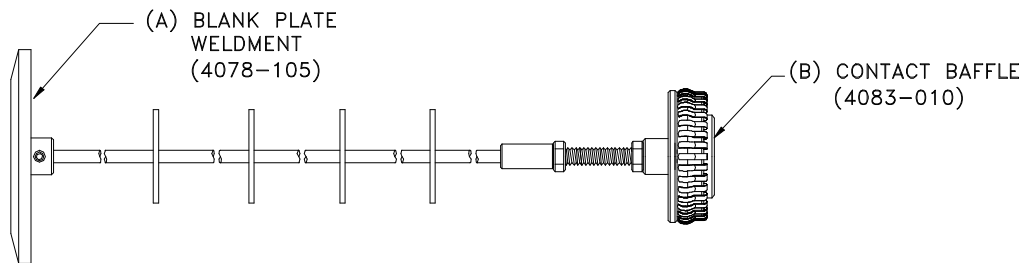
Sample-chamber baffle assembly with contact baffle
